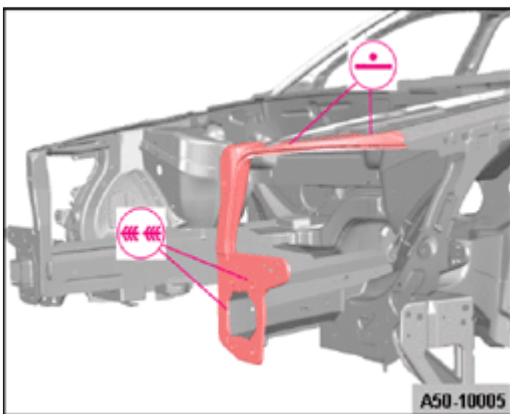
Welding In New Part, Straight-Line Spot Weld Seam
